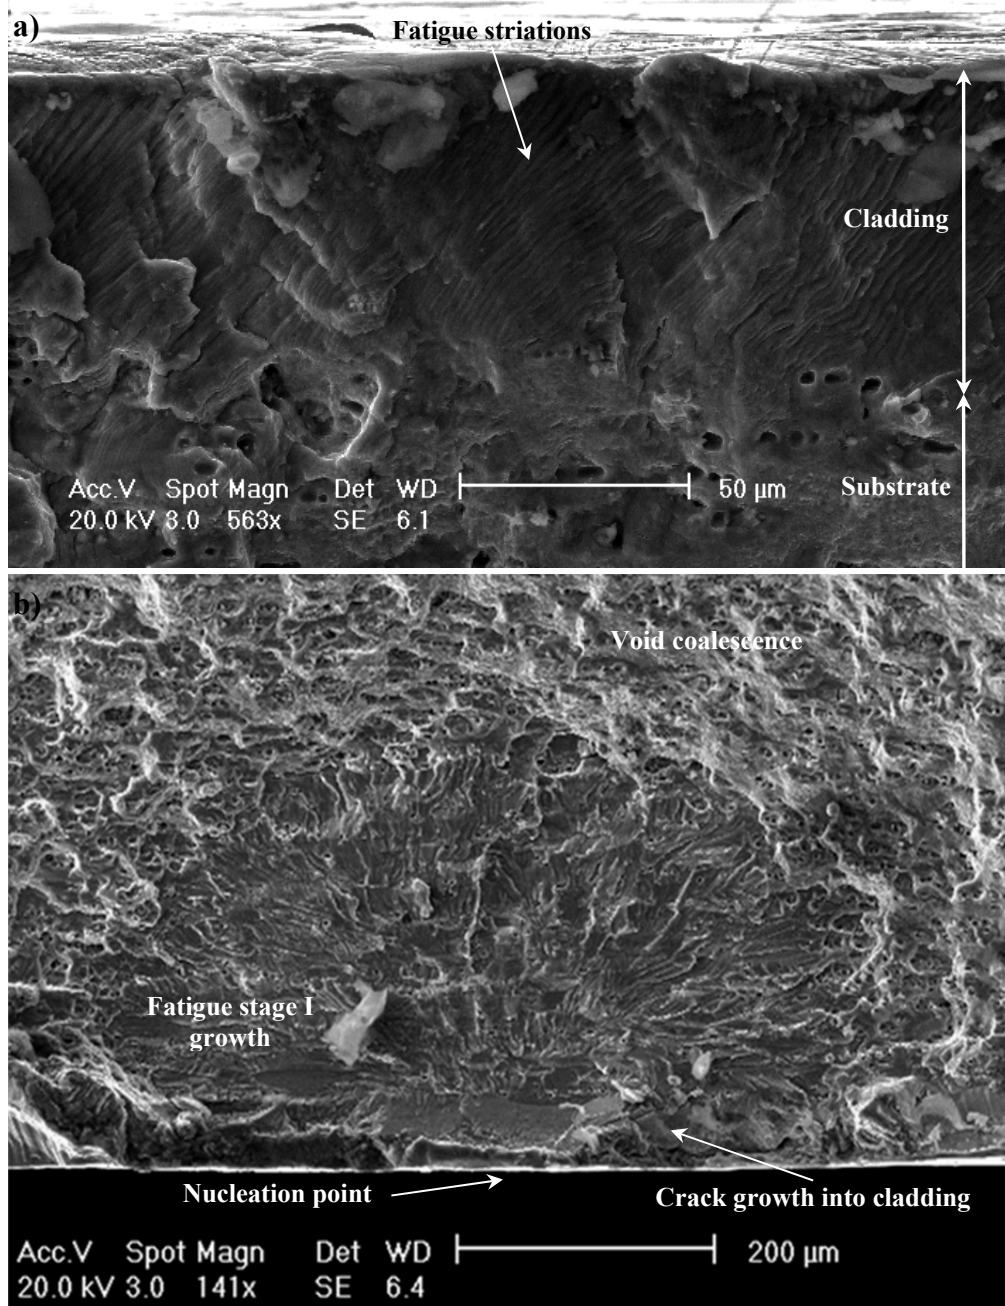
Clad layer cracking (a), secondary crack nucleated into the cladding (b) in T-C-0-0
